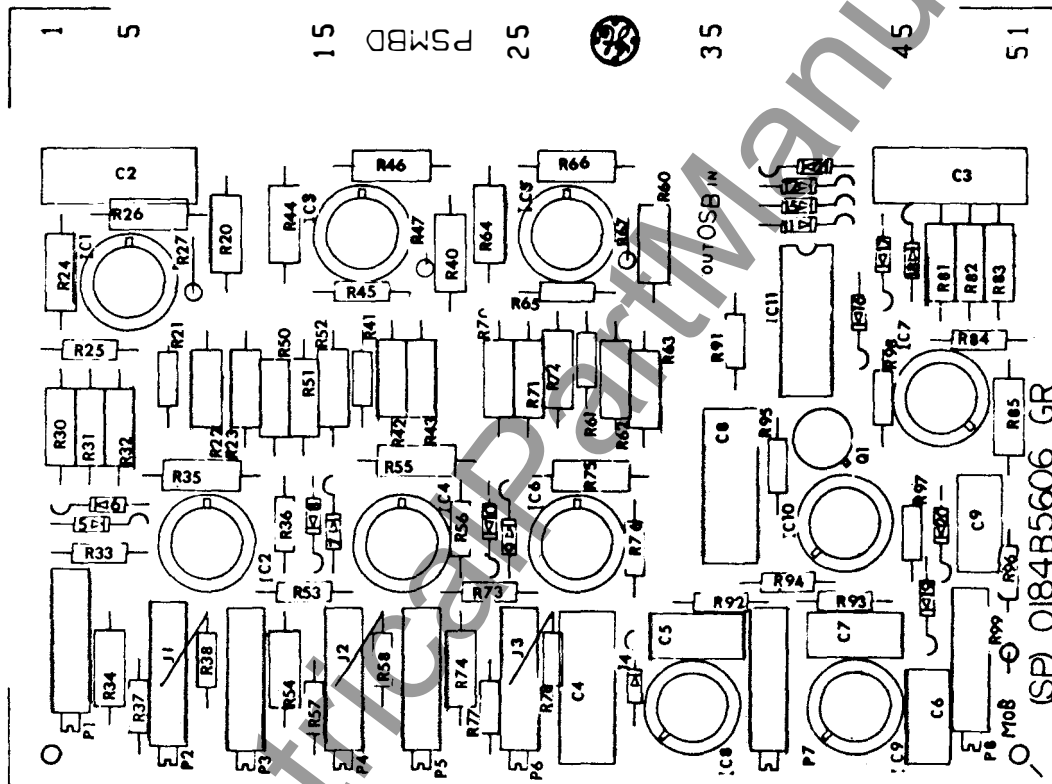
B (0171C8706 [8]) Card Layout for Type SLY81A Signal Processing Card (SP)
